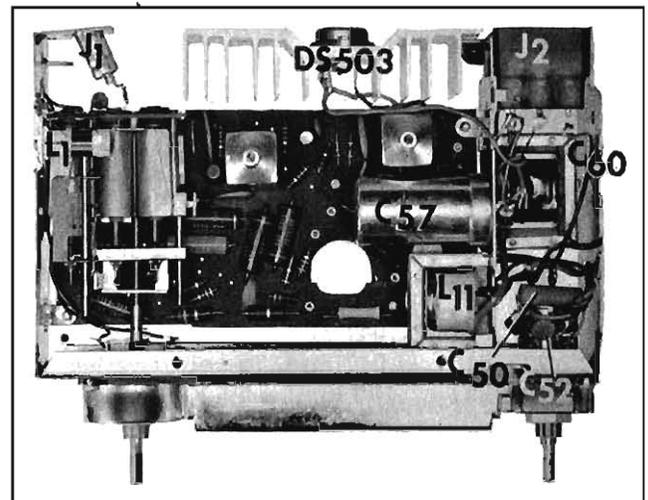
CHEVROLET TRUCK - PARTS LAYOUT - TUNER VIEW - 985672
